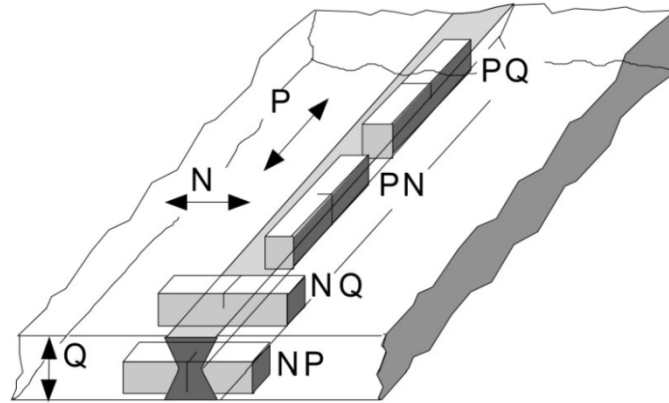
ISO 15653 standard – notation for specimen extracted from welded joints [2.20]
